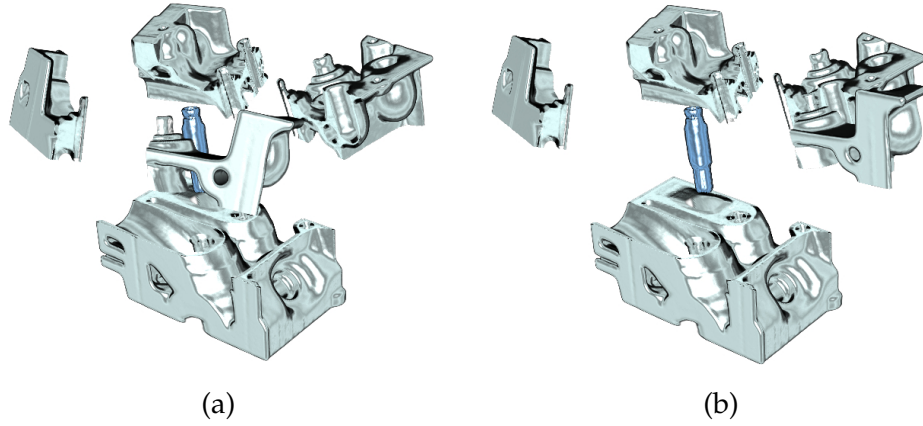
View-dependent exploded views. (a) Exploded view without viewing force – a part occludes the selection (dark blue). (b) Exploded view with viewing force – the occlusion is resolved.
